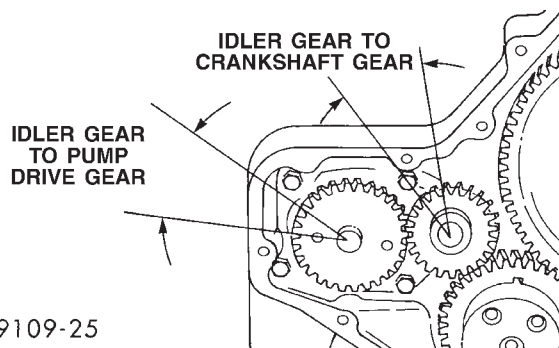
Measure Gear Backlash1 - OIL PUMP DRIVE GEAR
